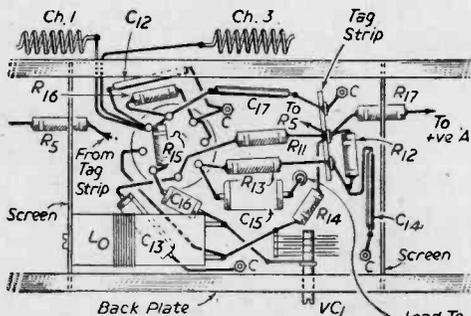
Layout of the frequency-changer stage. In this illustration the parts appear more spaced out than they are in practice.
